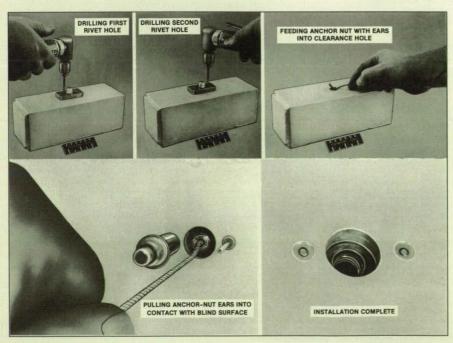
These are Some of the Steps of a simple installation procedure that is performed with the help of the fixture shown in Figure 1.
